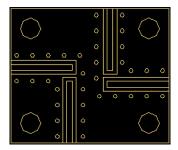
Cleaning the PCB Surface Where the RCP2250C03 is Soldered
